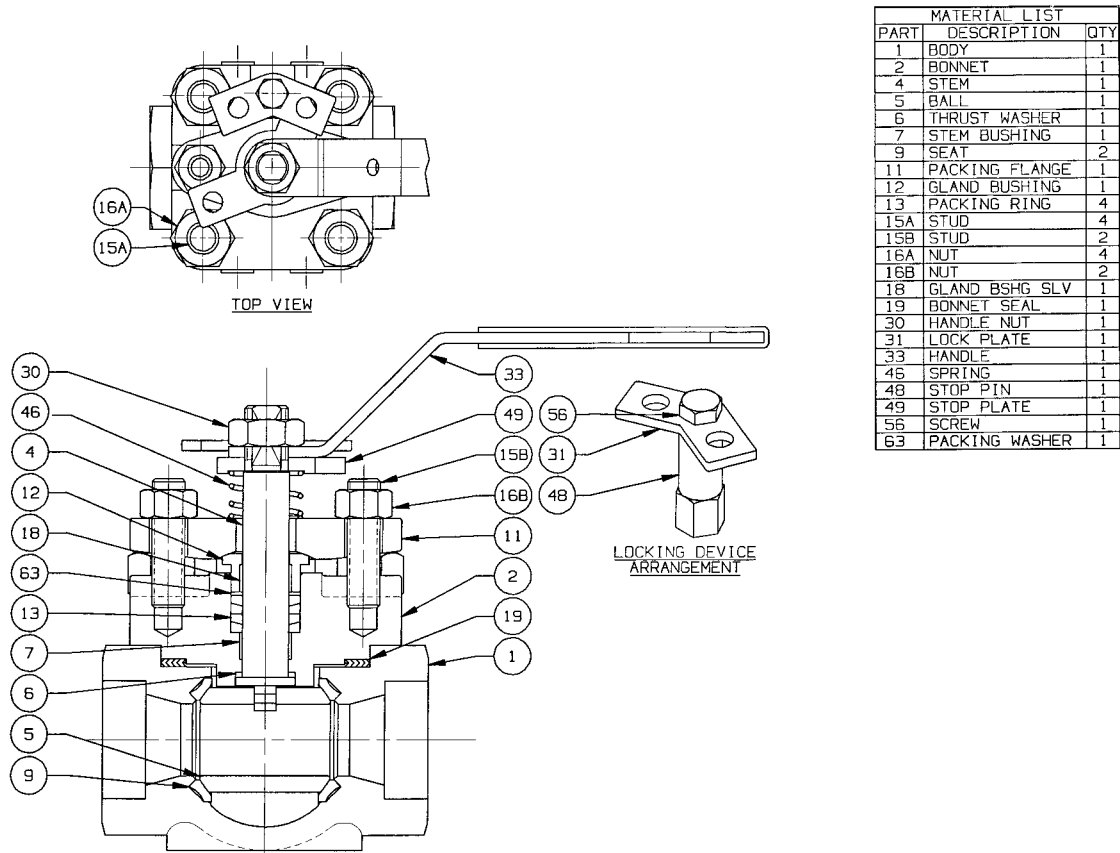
Ball valves, top entry, regular port, socket weld ends. (Courtesy of Velan.)
